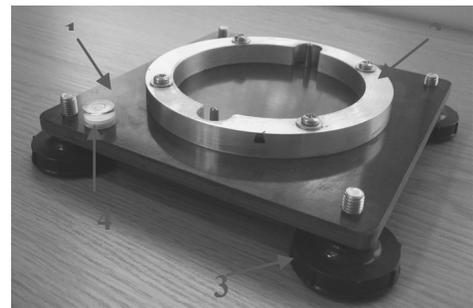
Mould to specimen casting; 1 –bottom plate, 2 – steel ring, 3 – mould levelling foot, 4 – level line
